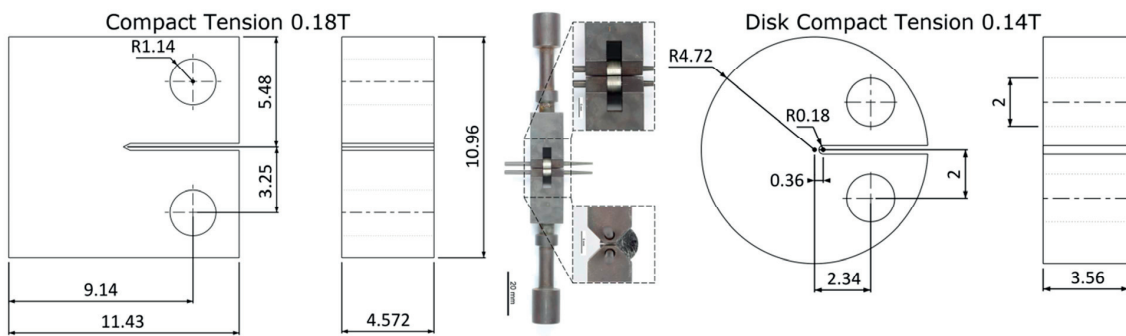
Fracture compact tension specimens; Left: 0.18T CT and Right: 0.14T DCT specimen as well as the developed gripping system is shown (dimensions in millimeters).
